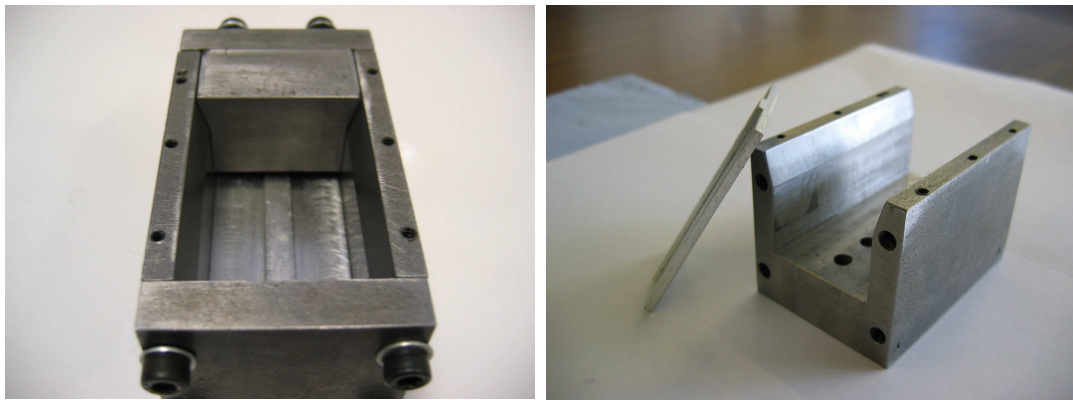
Jig used to produce the 50mm long stator tooth pieces
